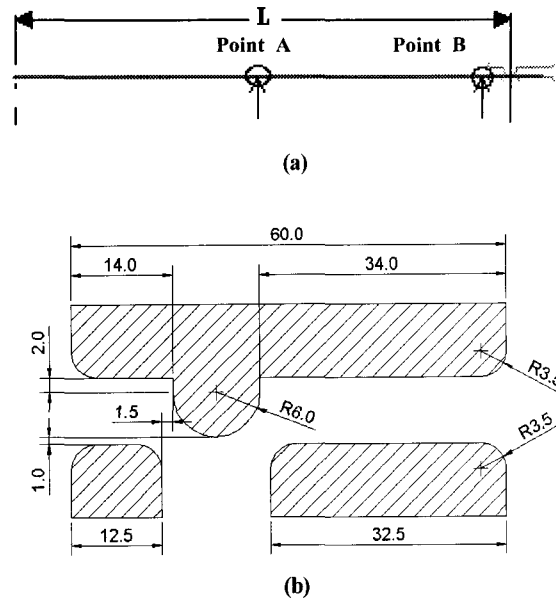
Geometric dimension of drawbead and dies: (a) Definition of L, point A and point B; (b) Bead Geometry of basic model
